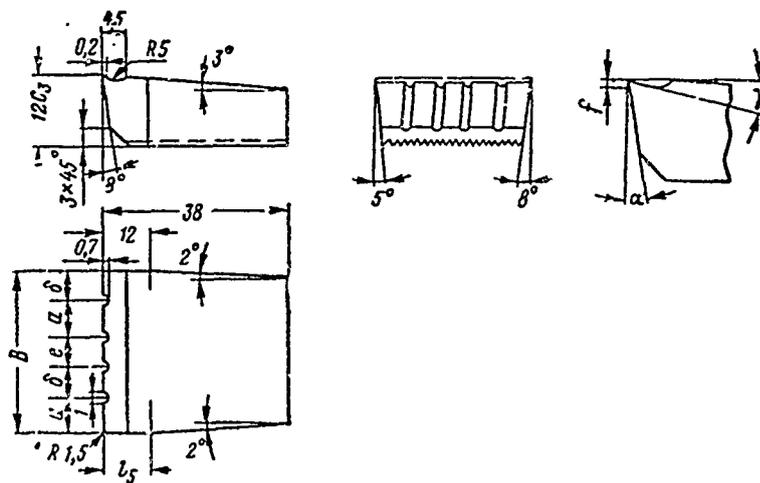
Ring drilling head cutter (cutter material -- steel R9)
